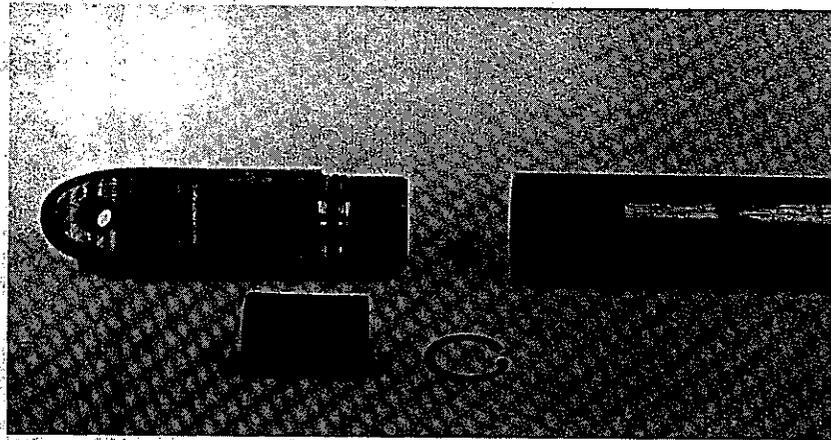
Lower end section showing desiccant canaster and retainer clip.
